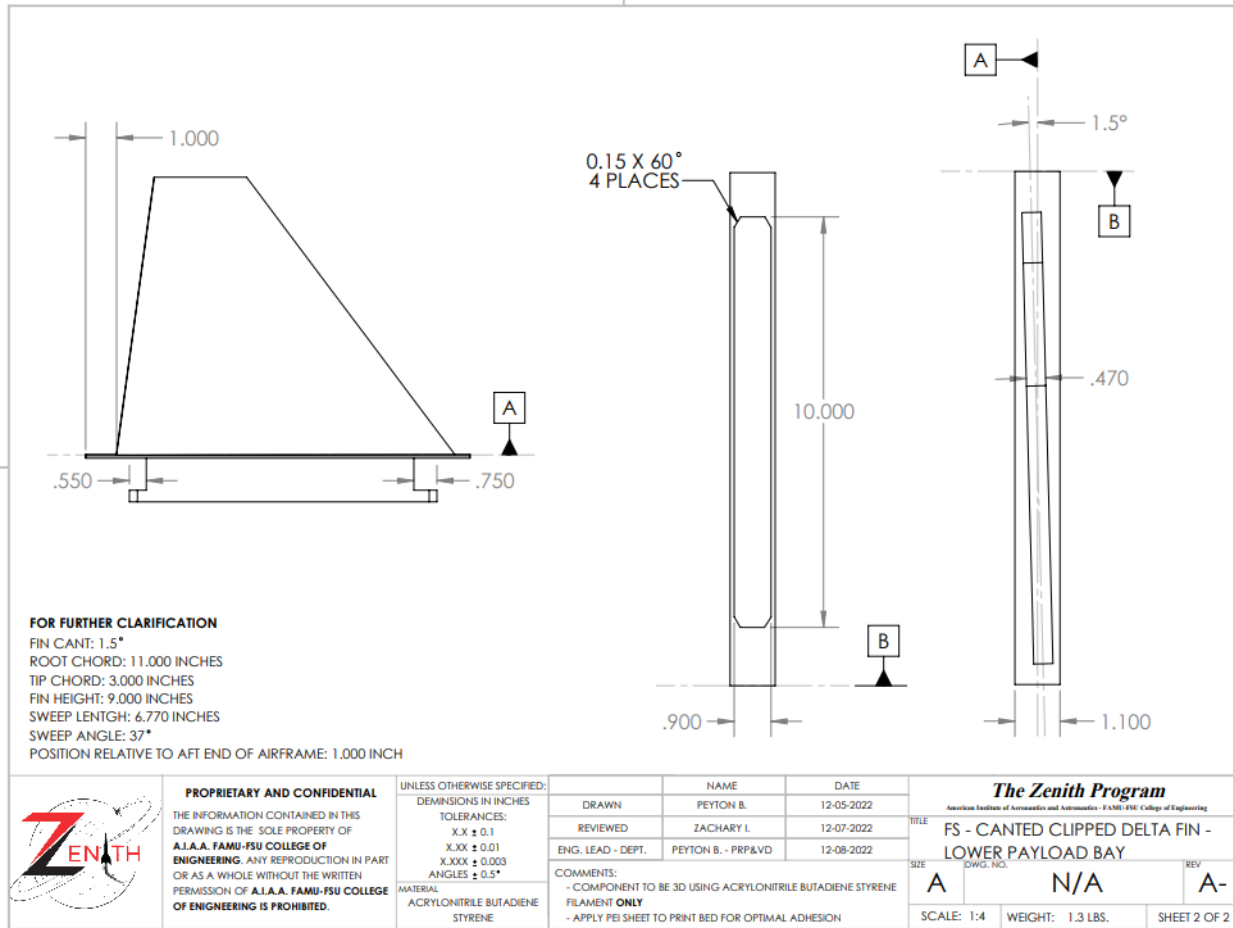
Canted Clipped Delta Fin CAD Drawing Sheet 2 of 2
